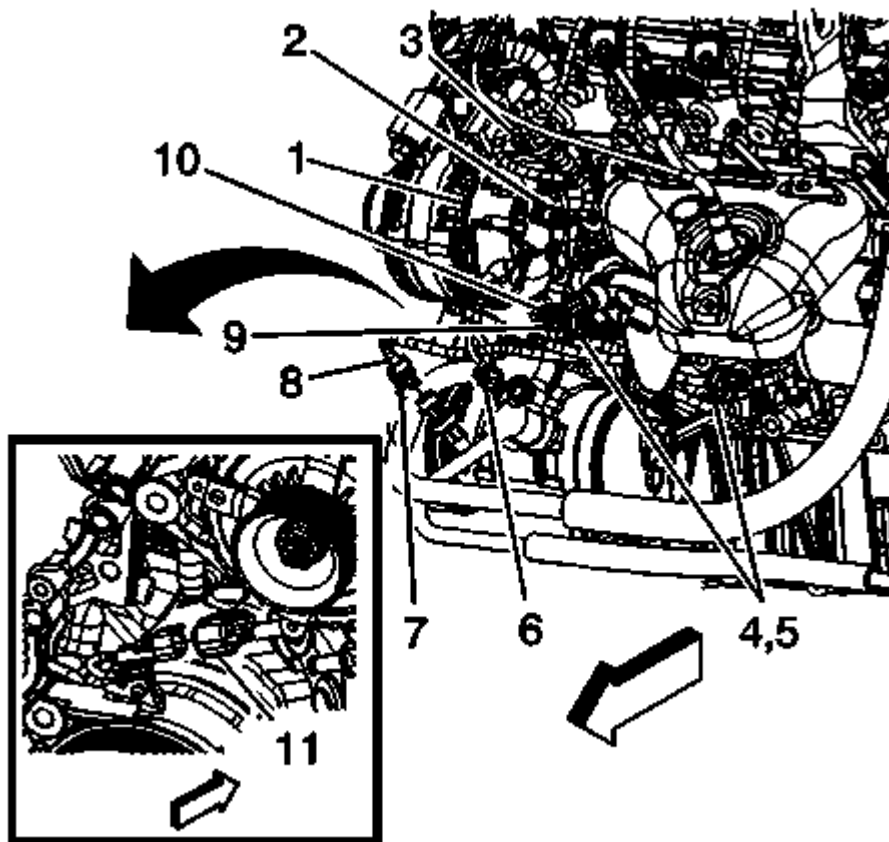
Identifying Generator, A/C Compressor, Oil Pressure Switch & Retainer Clips
